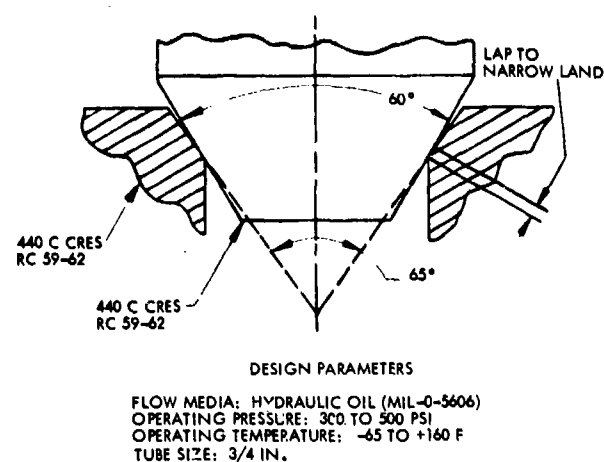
Hard Conical Poppet Seat Design for Hydraulic Relief Valve
